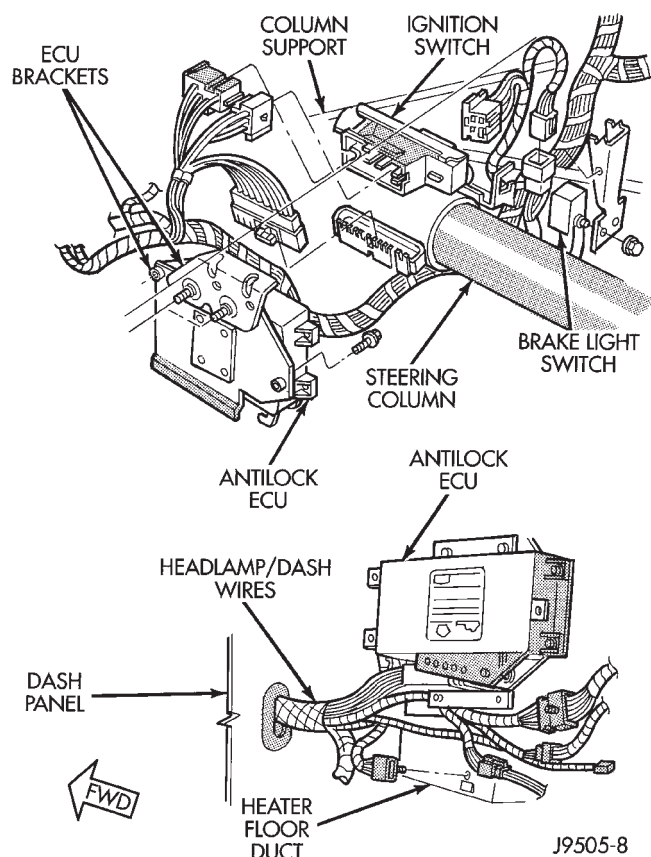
Antilock ECU Mounting (Left Hand Drive XJ)
